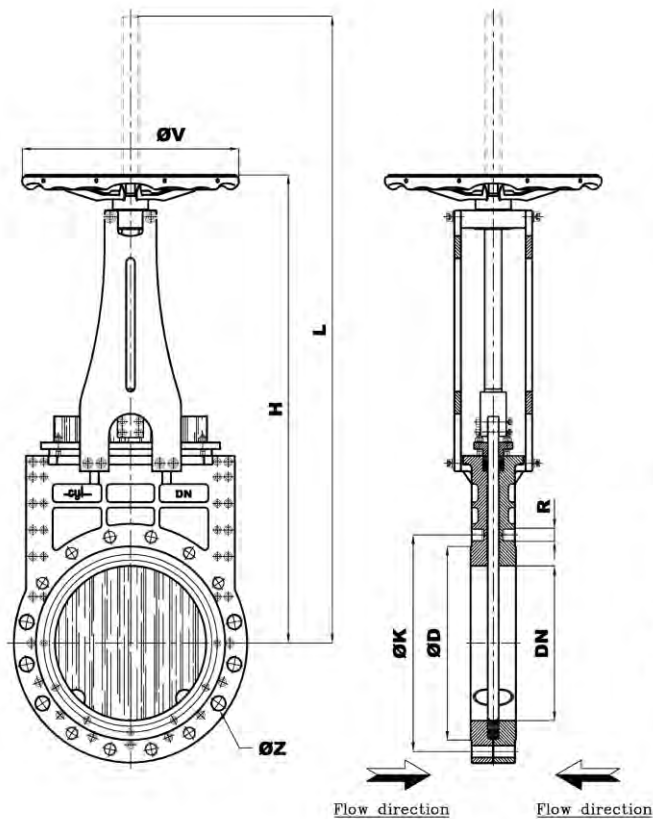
KGV XD-HP series rising stem with handwheel & gearbox
